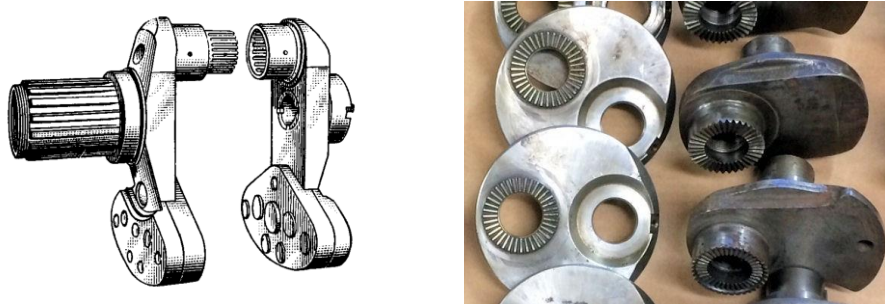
PRATT & WHITNEY WASP CRANKSHAFT (LEFT) AND PORSCHE 1500 ROLLER BEARING CRANKSHAFT MANUFACTURED BY HIRTH (RIGHT).
